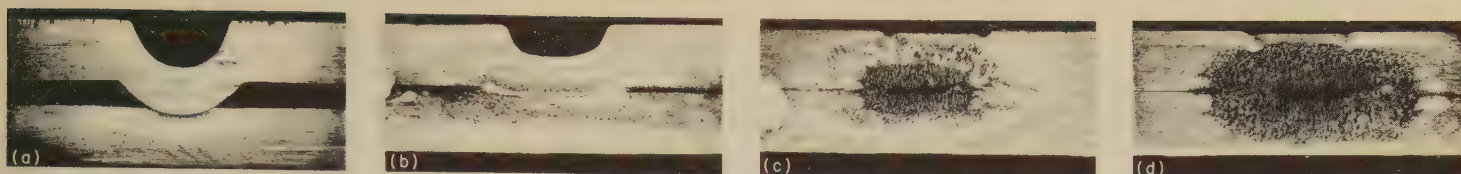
Four stages in the development of a weld nugget in 0.092-in.-thick low-carbon steel during projection welding, using embossed spherical projections 0.050 in. high and a weld time of 20 cycles
